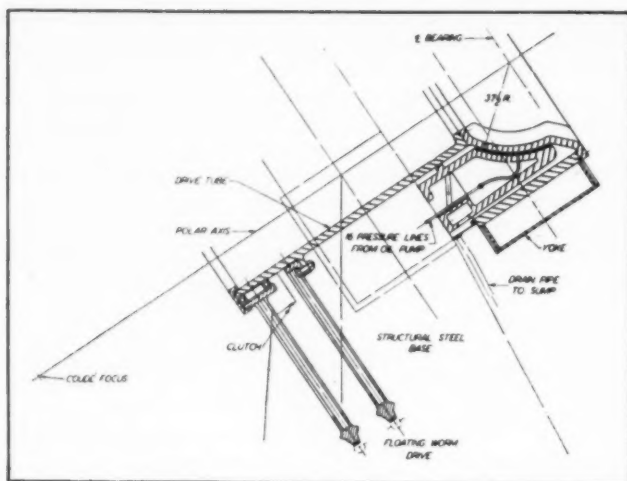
CONSTRUCTION DETAILS OF SOUTH POLAR BEARING
